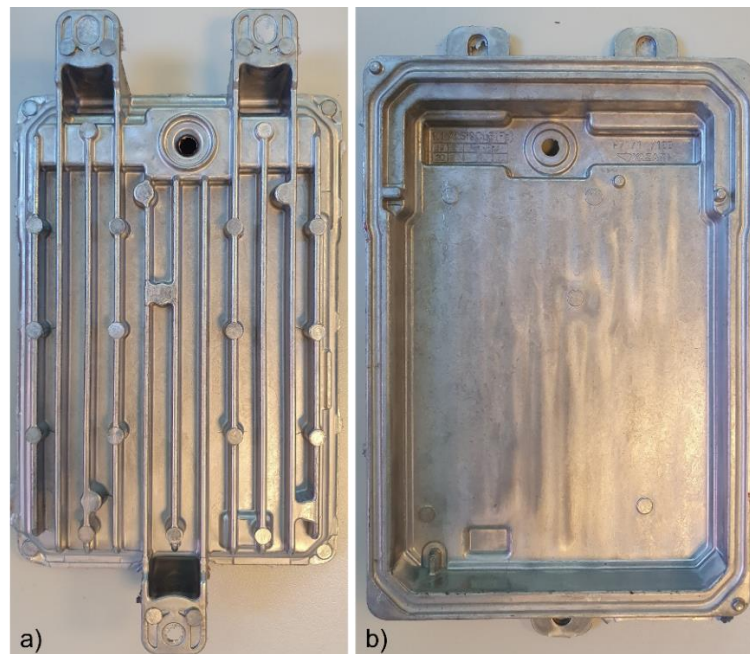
Power electronics casing. a) top view of the part; b) bottom view of the part.
